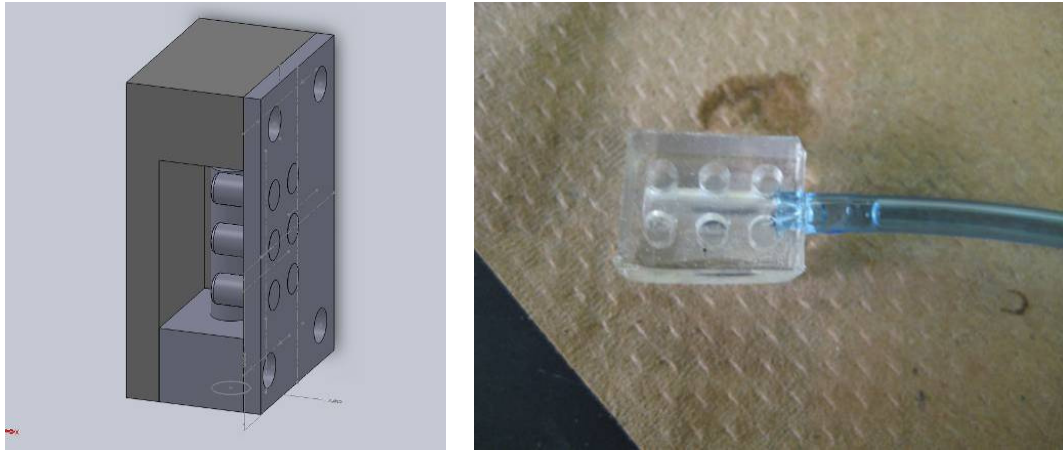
(Left) CAD Drawing of mold for single tube actuator. (Right) Single tube actuator during fabrication
